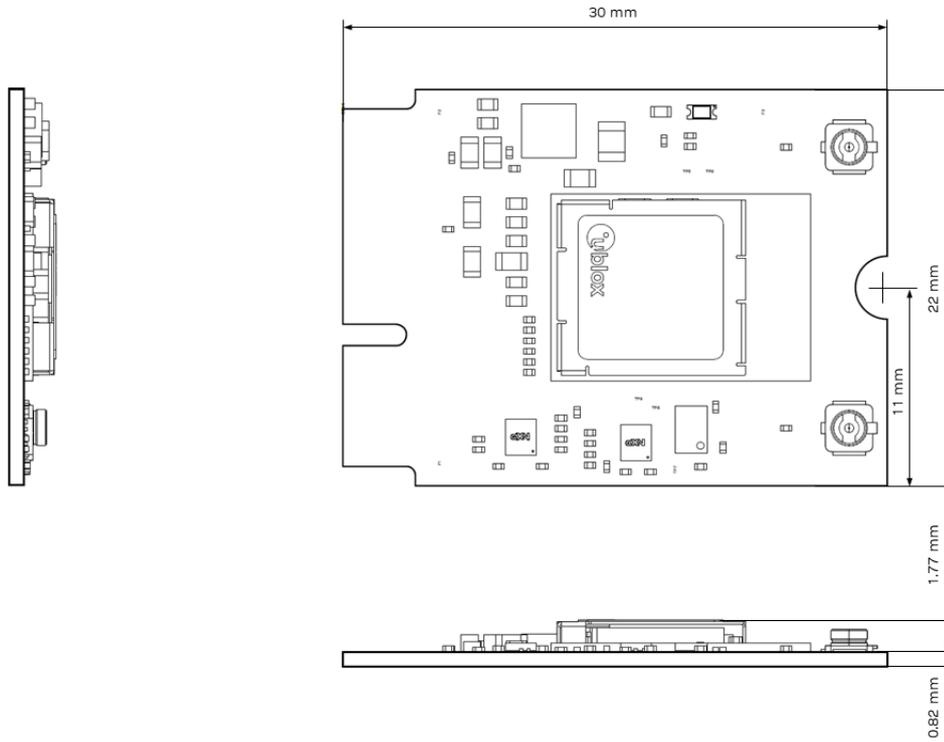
Physical dimensions of the M2-MAYA-W2 card
